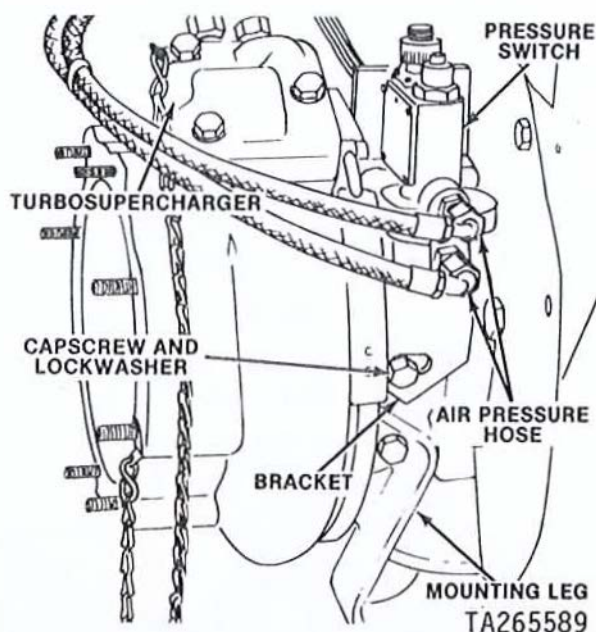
Removing or Installing Right Bank Dust Detector Pressure Switch
